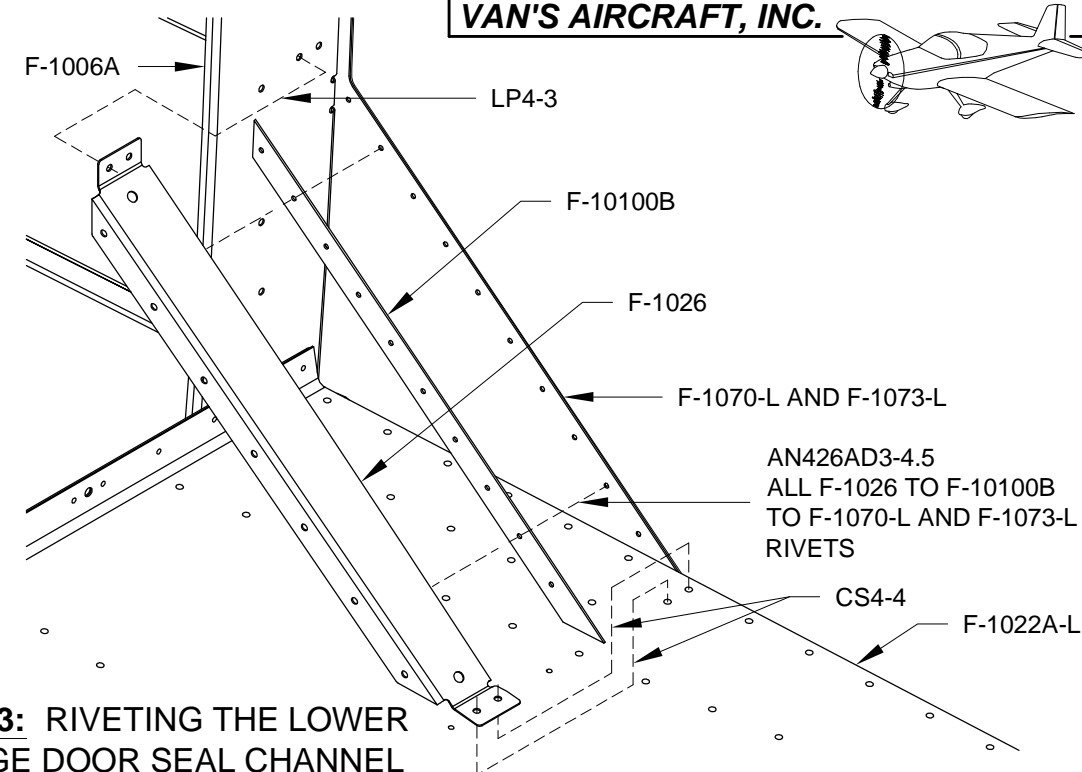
RIVETING THE LOWER BAGGAGE DOOR SEAL CHANNEL
